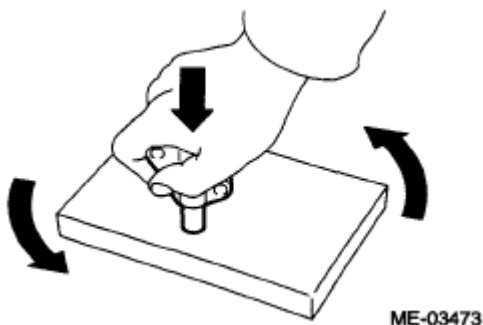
Rotating Rubber Mat And Pressing Chain Tensioner
